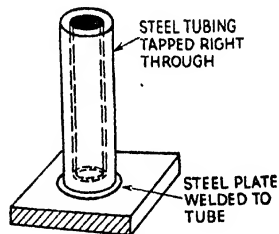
ONE METHOD OF FIXING A PUNCH IN THE DROP-STAMP MACHINE
